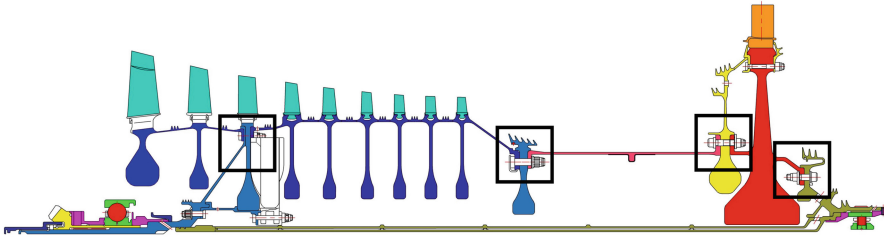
The bolted joints with spigot in aero-engine rotor system
